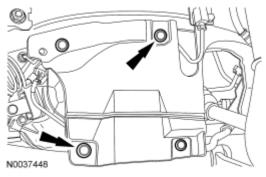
Locating LH Splash Shield Pin-Type Retainers Courtesy of FORD MOTOR CO.
